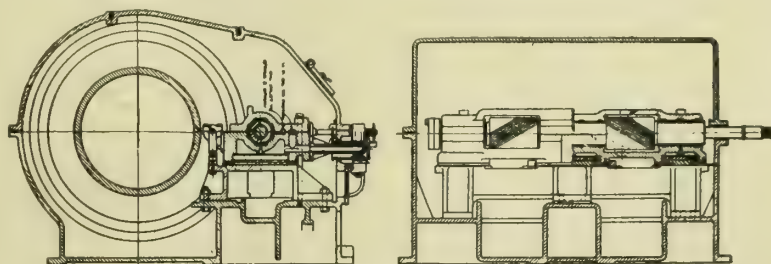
ARRANGEMENT WITH REDUCING GEAR.
